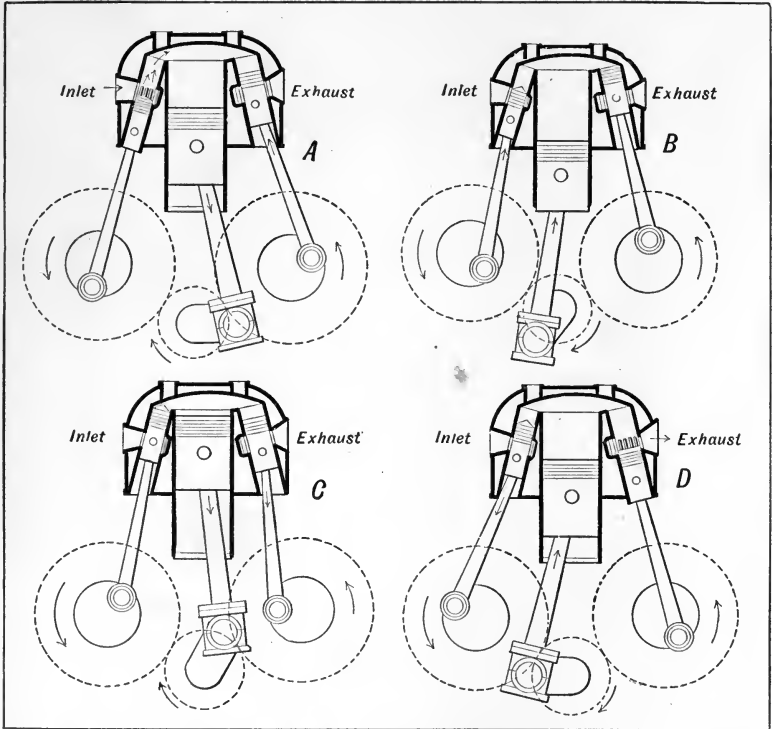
Hewitt Piston Valve Motor Action Outlined Graphically. A—Suction Stroke. B—Compression. C—Explosion. D—Exhaust.
